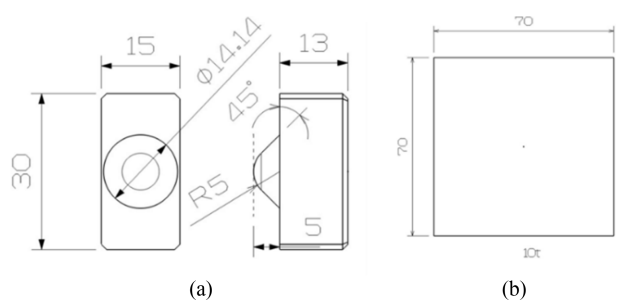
Geometry of printed parts; (a) Bump and (b) Block
